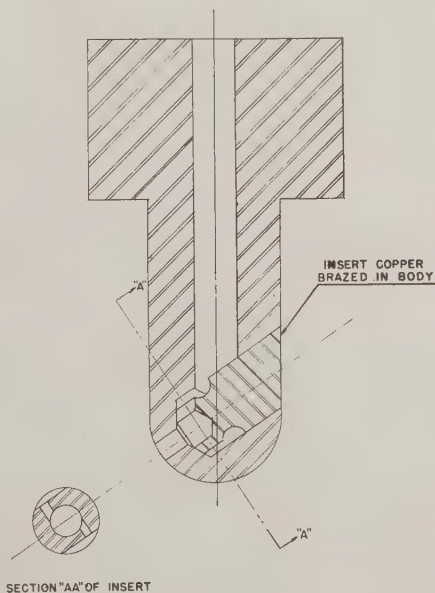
DIESEL INJECTOR-NOZZLE TIP
